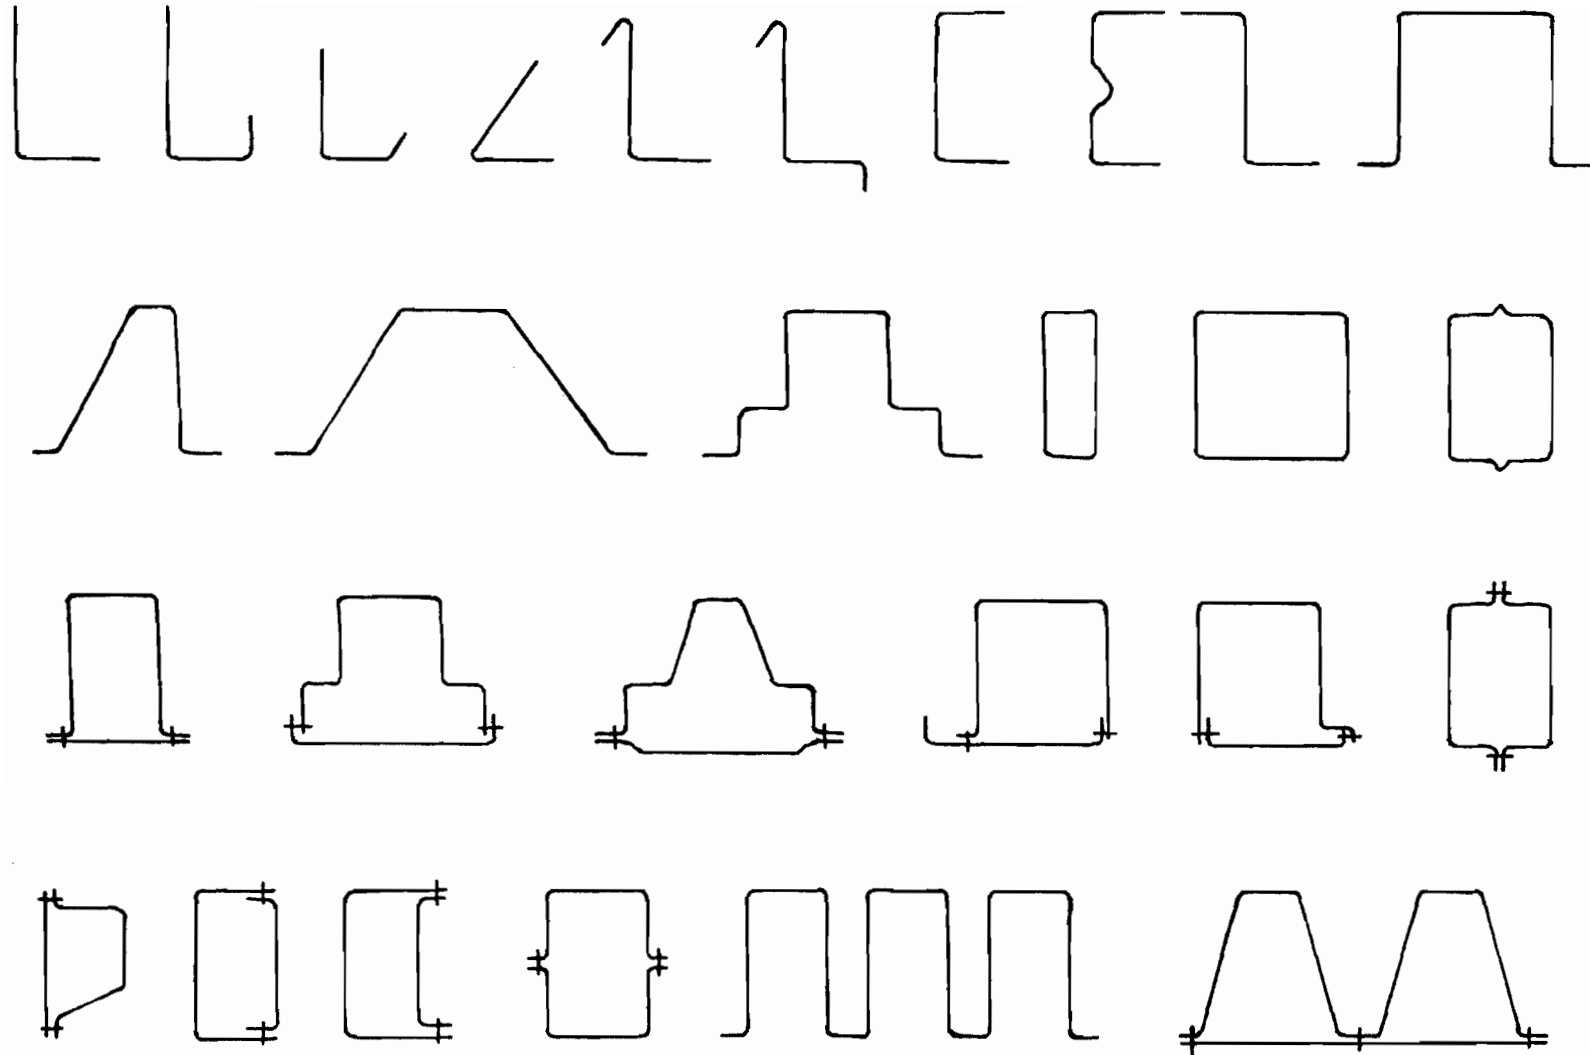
Individual Members and Built-Up Sections Used as Structural Components of Automotive Structures
